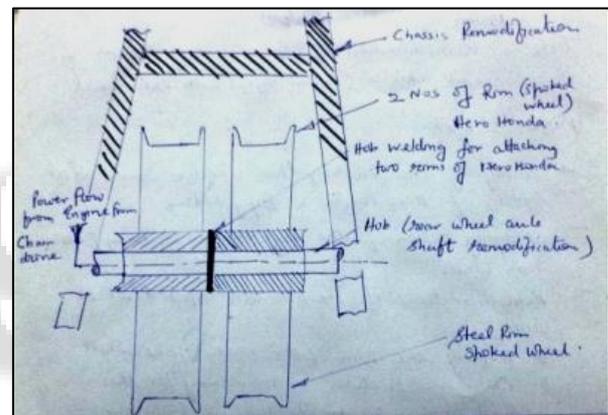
Cut Section Free Hand Front View of the Proposed Co-Joined Rim
